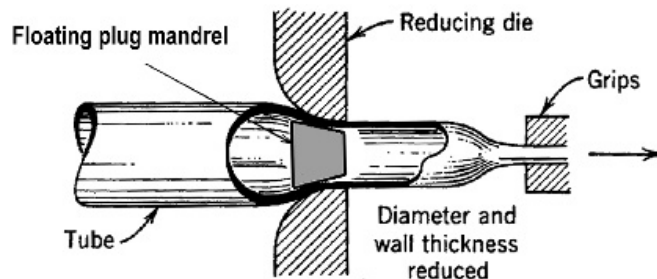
Tube drawing over a floating plug mandrel (Source: www.copper.org)
